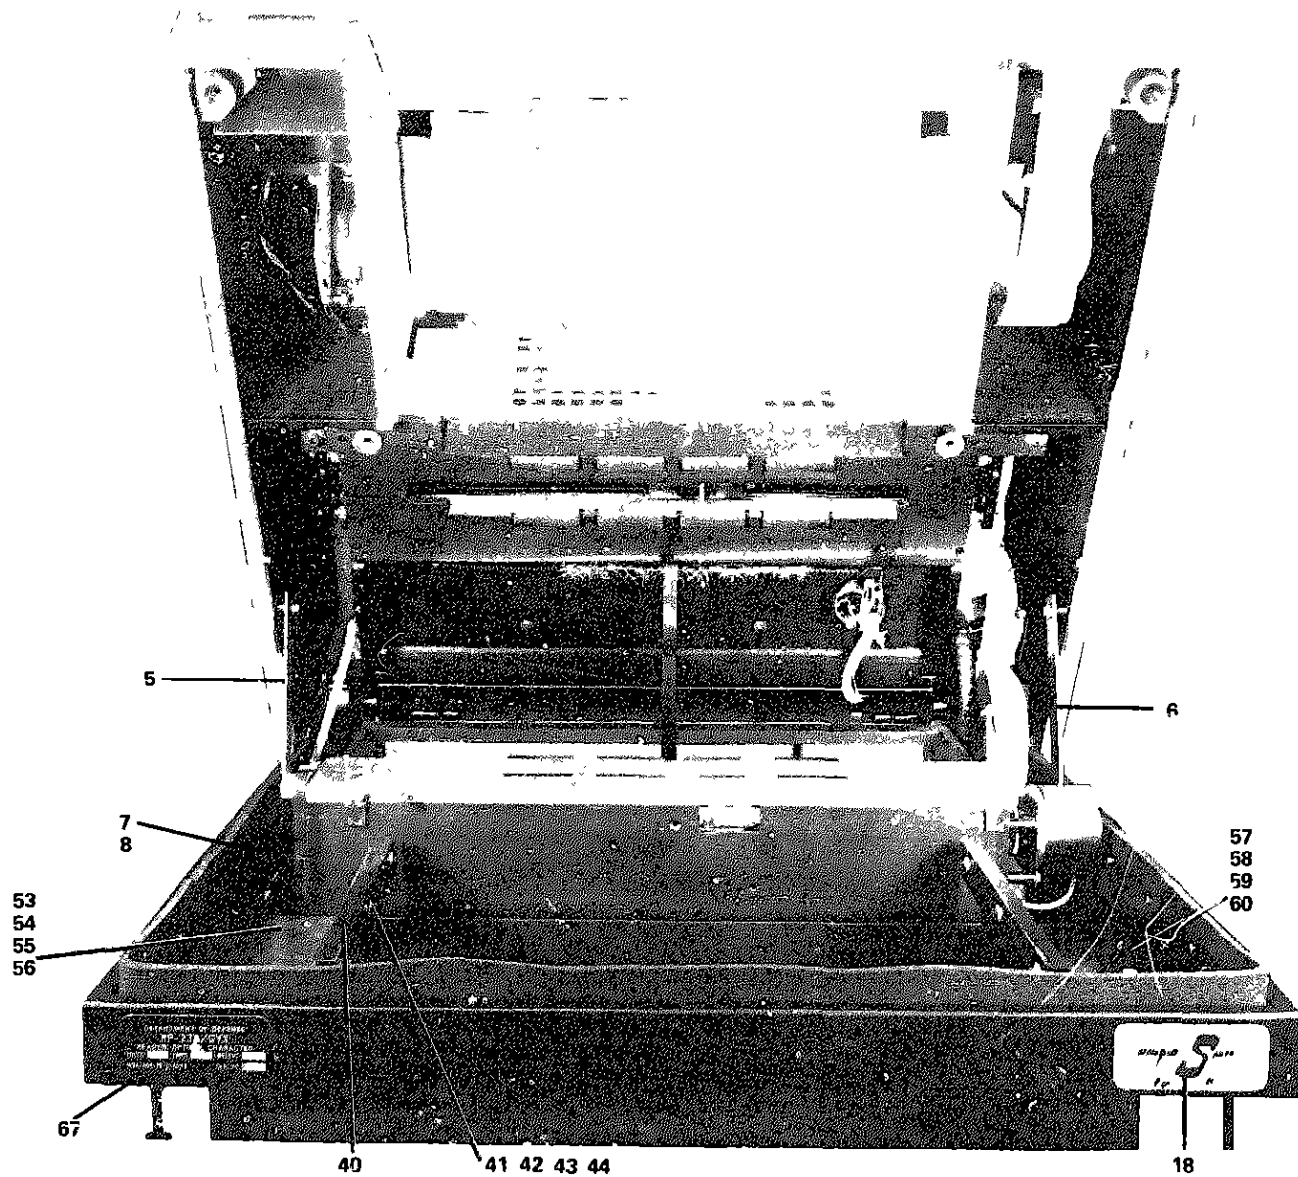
Cabinet Assembly Front 1A1 (Sheet 2 of 4)
